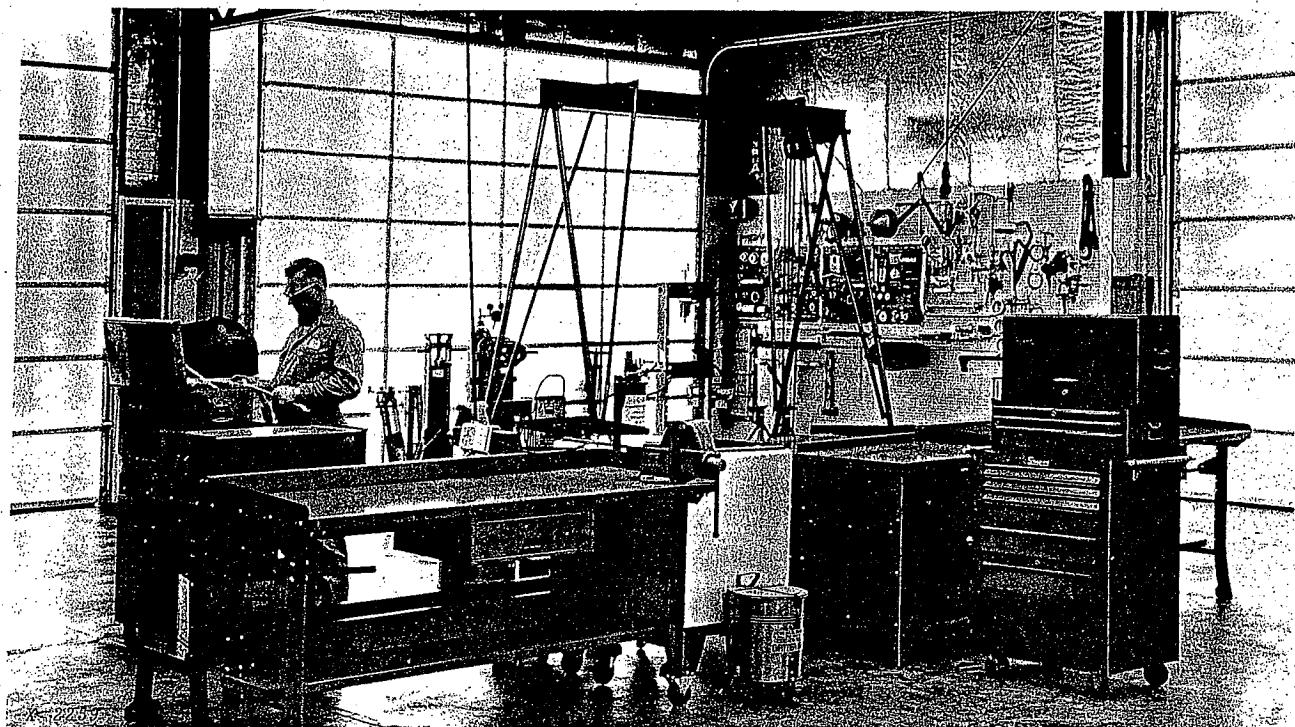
Tools Don't Make The Service Technician — But They Help
